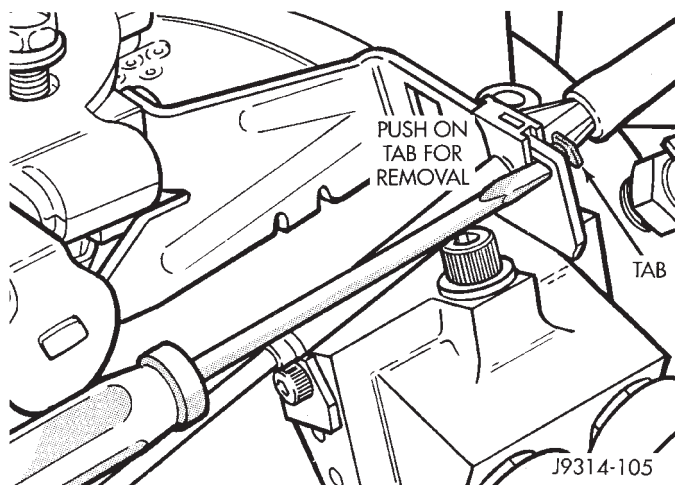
Cable Release Tab—5.2L Engines—Typical
